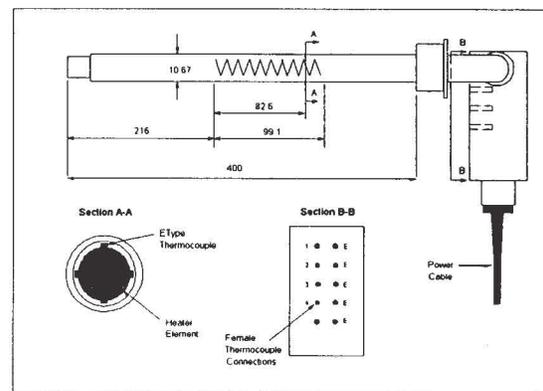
Schematic of Heat Transfer Test Rig Heater Probe
